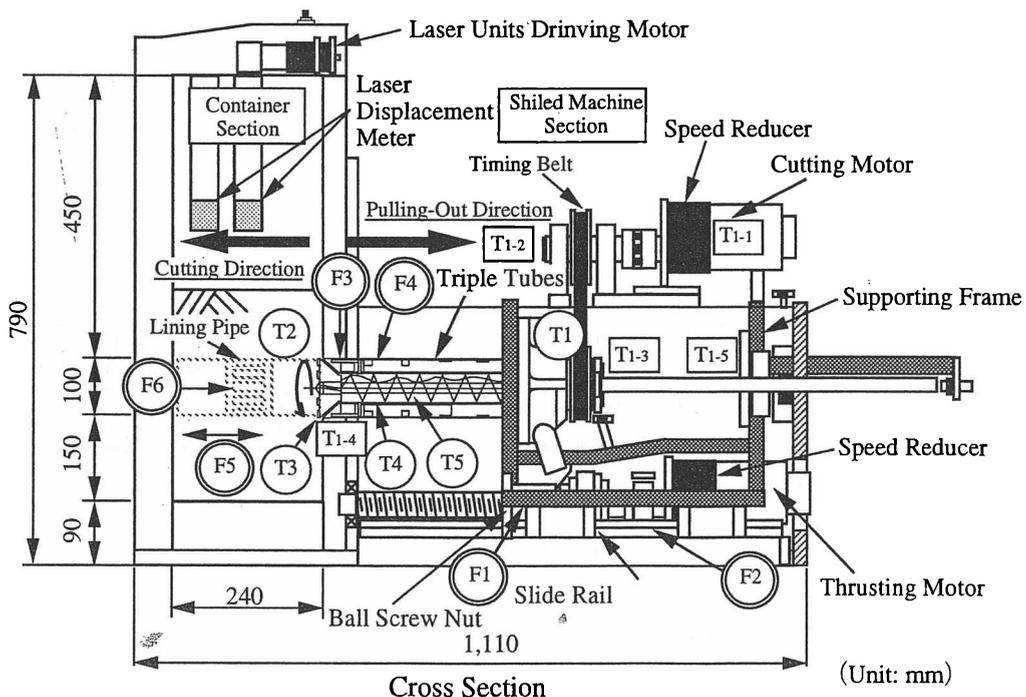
Thrust and Torque Generating Points of Model Shield Machine
